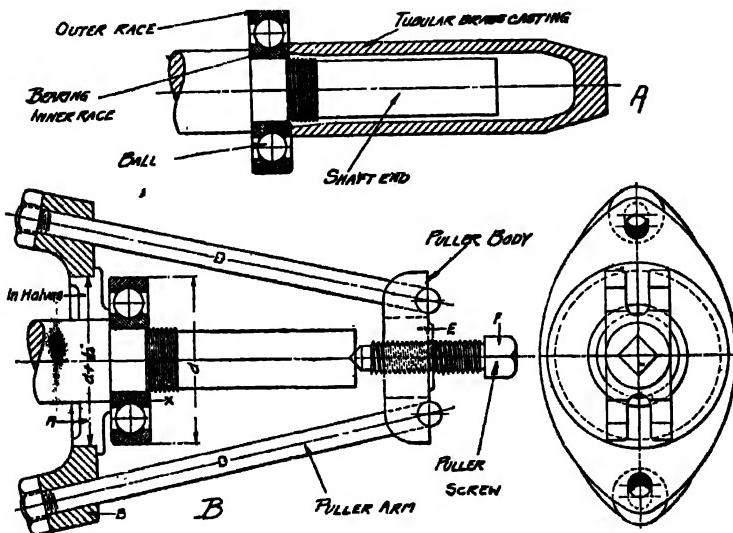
Simple Tools for Ball Bearing Installation and Removal.
